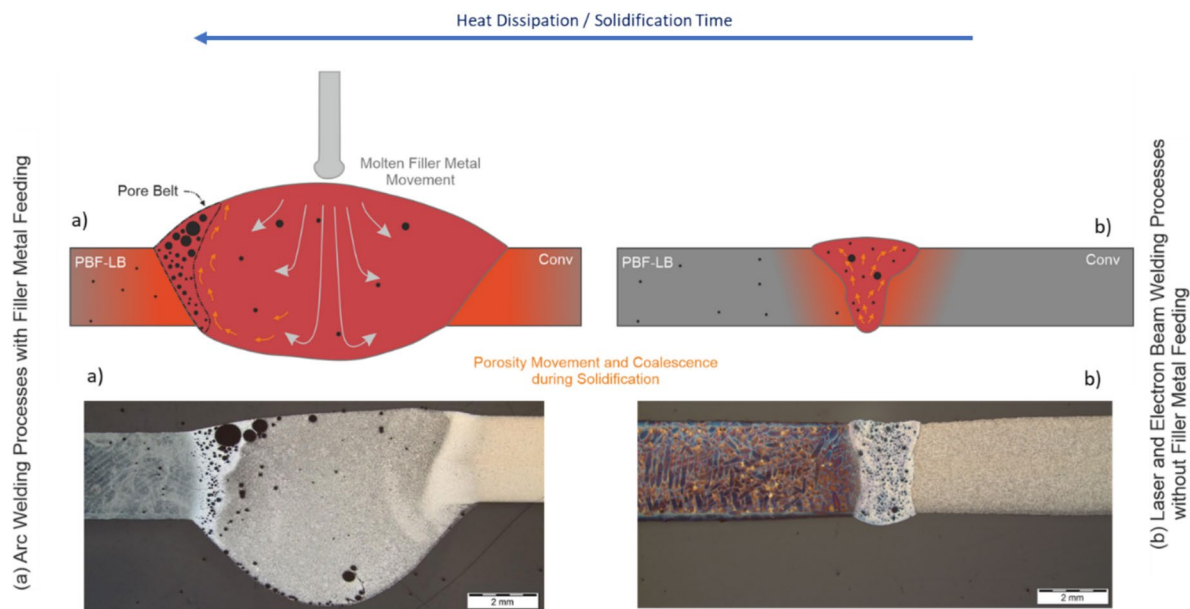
Mechanism of pore movement and coalescence in the welds of PBF-LB manufactured Al alloys by arc welding (a) and laser and electron beam (b) welding processes [35]
